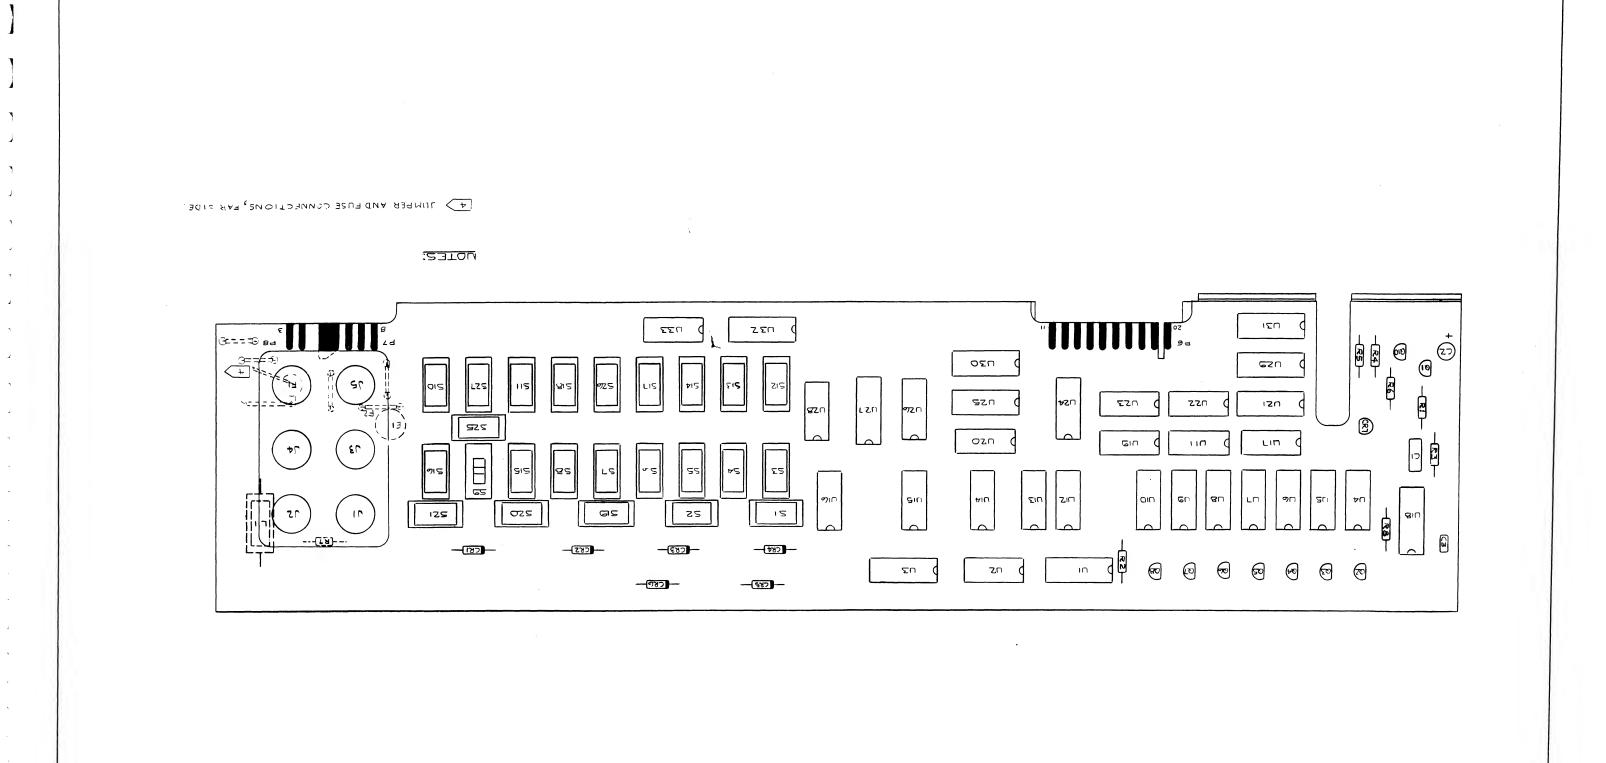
A6A2 Prom Rom PCB Assembly— Double PCB Version (cont)
